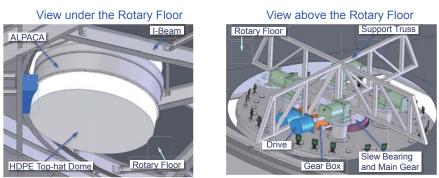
Left: View (under) of ALPACA mounted on the rotary floor. Right: ALPACA mount concept shown installed on the rotary floor. For proper focus, the cryostat must sit almost entirely below the floor plate surface. A truss structure transfers the instrument weight directly to the rotary floor I-beams. A $\pm 15^{\circ}$ instrument rotator couples the cryostat to the truss. Drive motors are blue, gearboxes orange, and slew bearing with integrated gear is purple.
